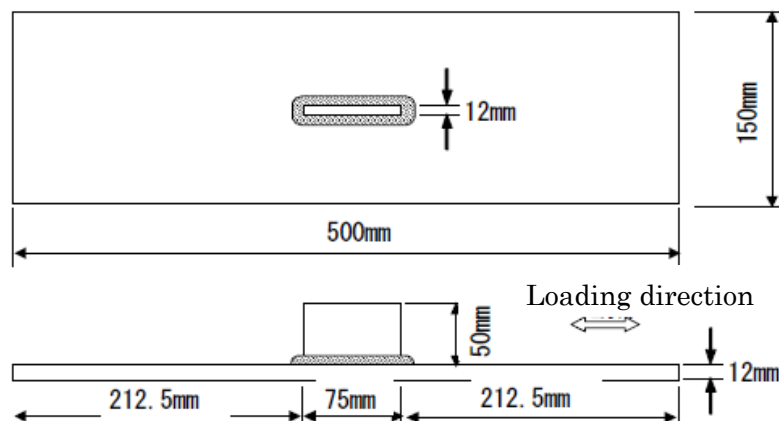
Test specimen (Out-of-plain gusset welded joint)
